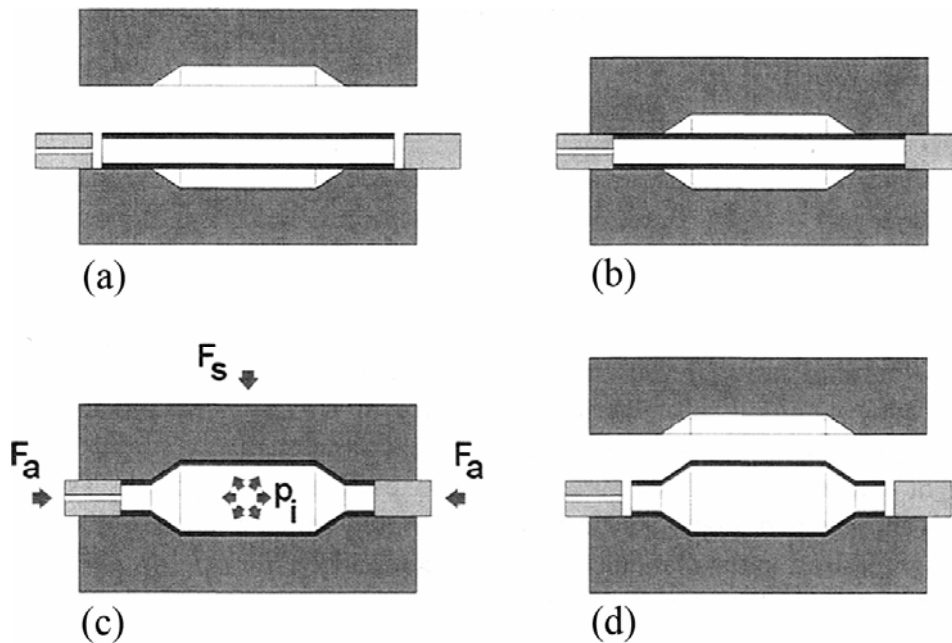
Schematic of the hydroforming process (a) Insertion of the tube (b) Die closure (c) Hydroforming and endfeeding (d) Removal of the part (Dohmann *et al.*, 2004)
